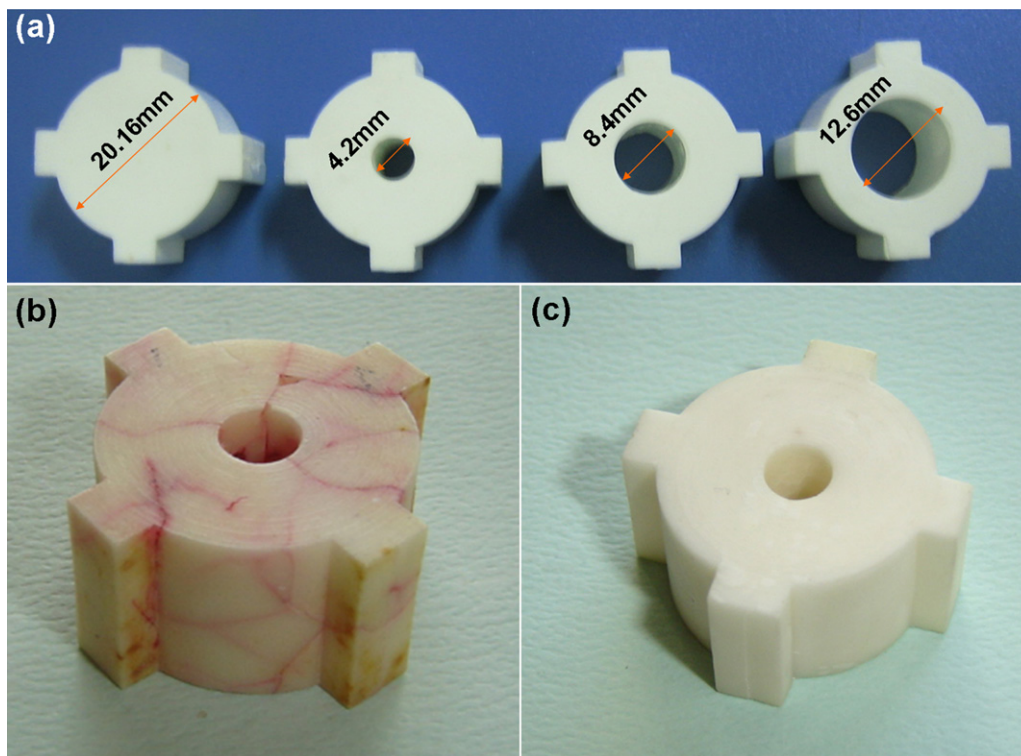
(a) Injection-moulded near gear ceramic parts with different core sizes via our method; (b) near gear ceramic parts via thermal debinding; and (c) near gear ceramic parts partially water-debinding.
